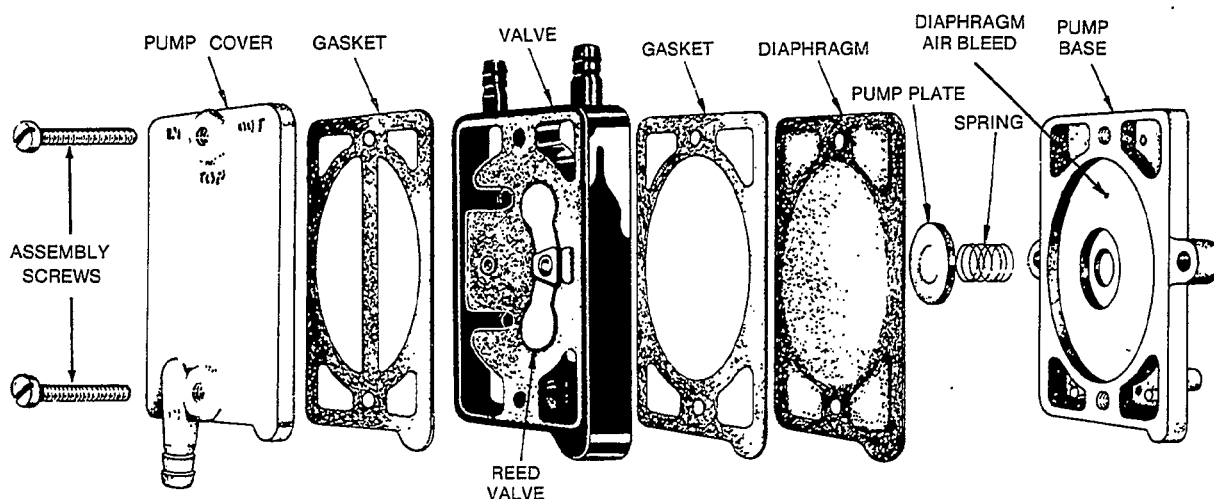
EXPLODED VIEW OF FACET PULSE PUMP
